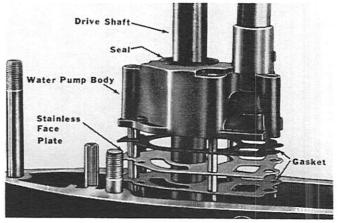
Installing Water Pump Assembly (New Style)Revised Dec. 1969Section III - Lower Unit
